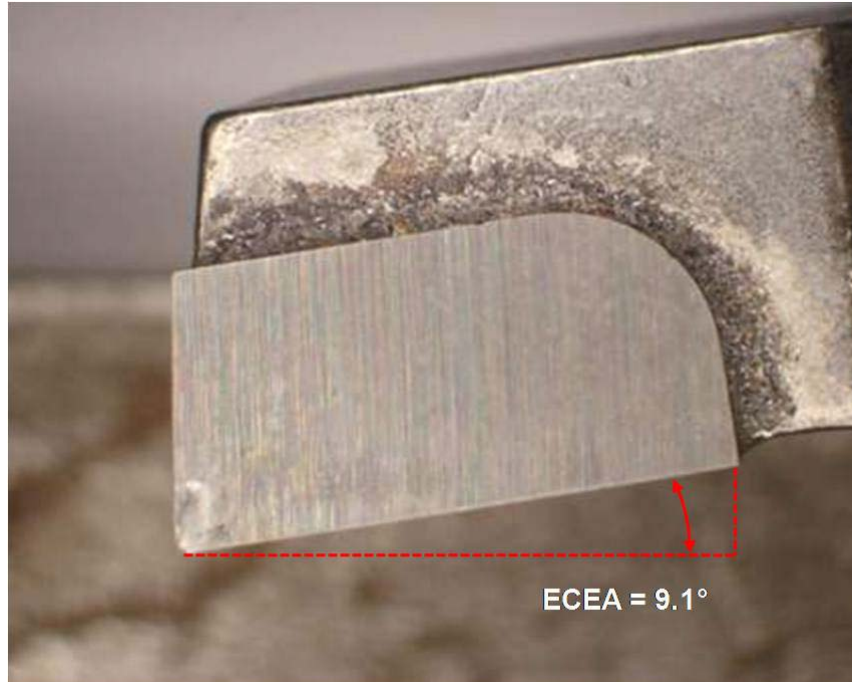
Flycutter face with End Cutting Edge Angle (ECEA).
